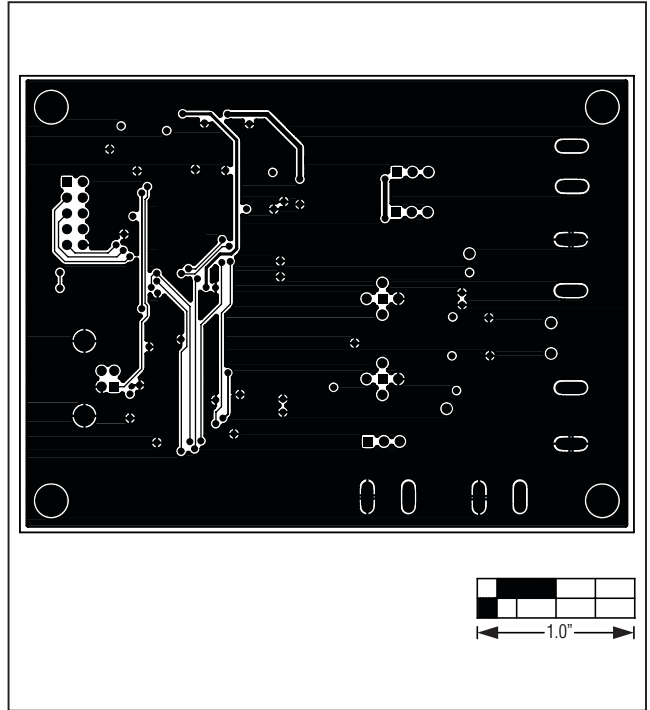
MAX9611 EV Kit PCB Layout—Solder Side
